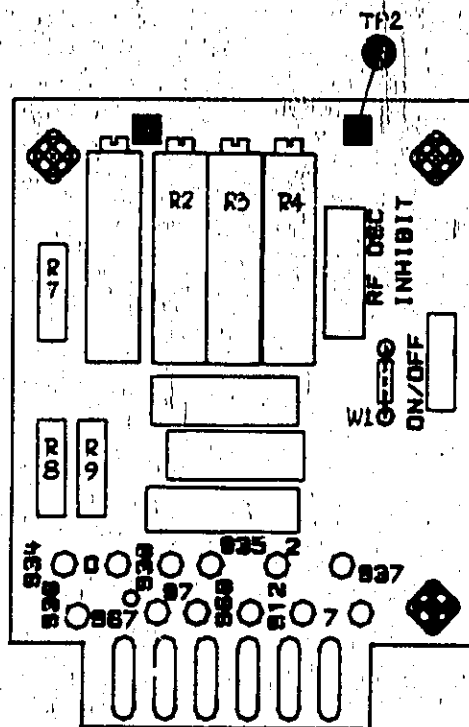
P/O A3A4 Connector Board Assembly Component Locations (P/O CHANGE 36)
